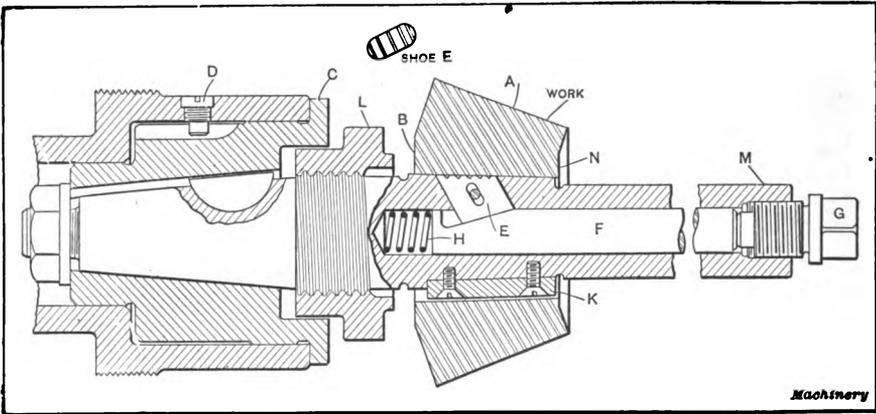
Arbor having Adjustable Shoe E which bears against Taper Bore of Pinion Blank
